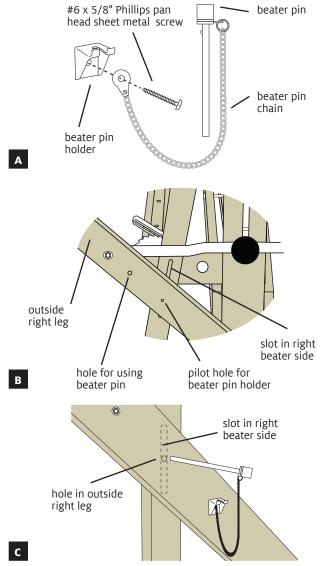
INSTALL BEATER PIN AND HOLDER
